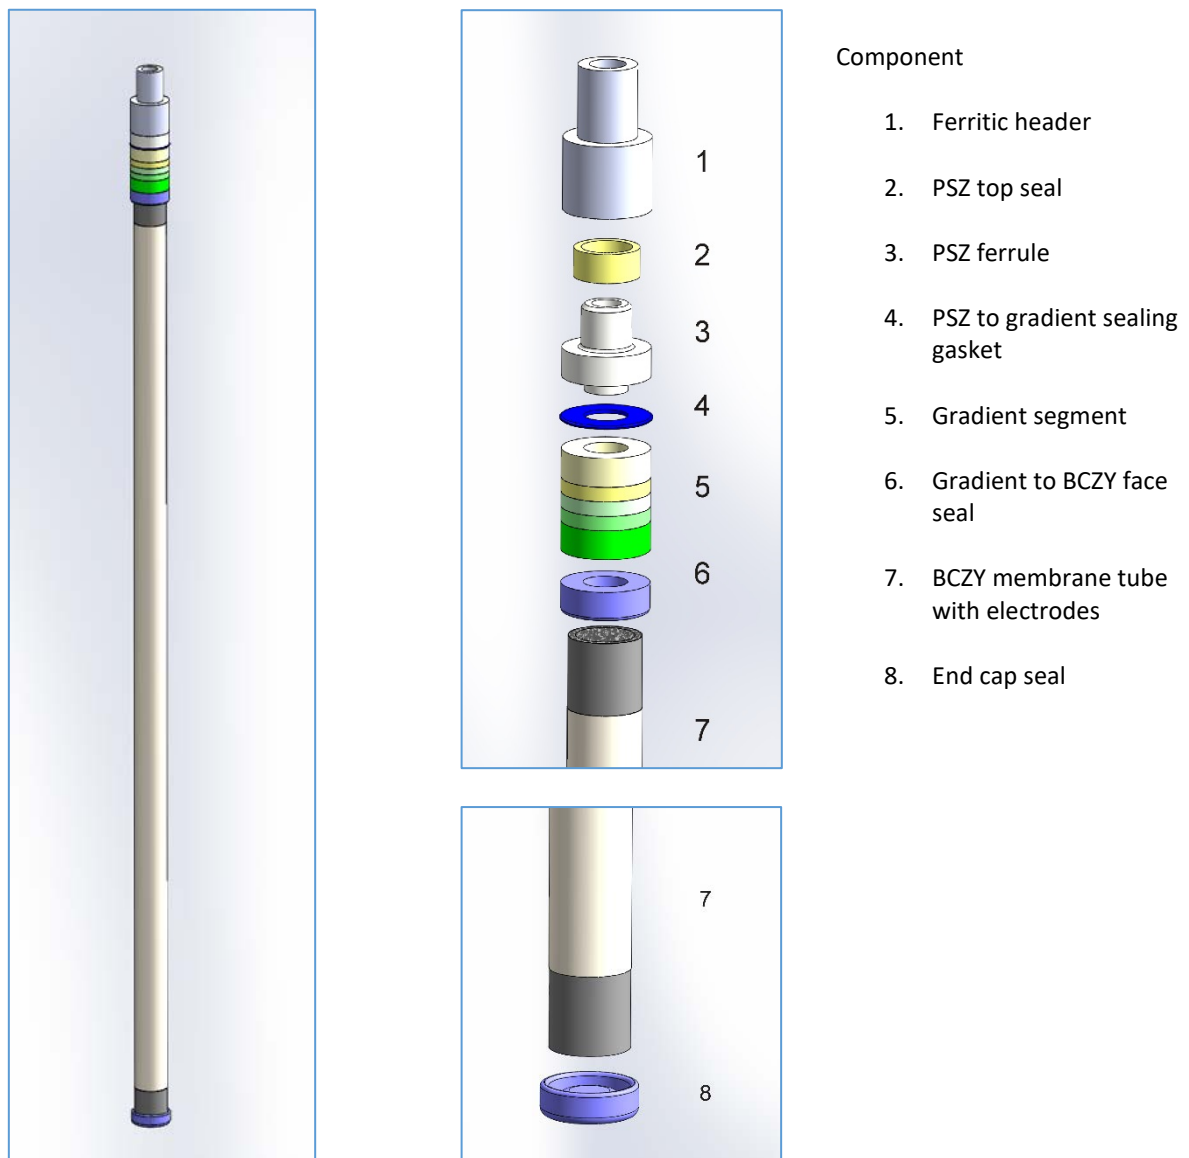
Components which make up 'tube-in-shell' assembly (shell not shown)
